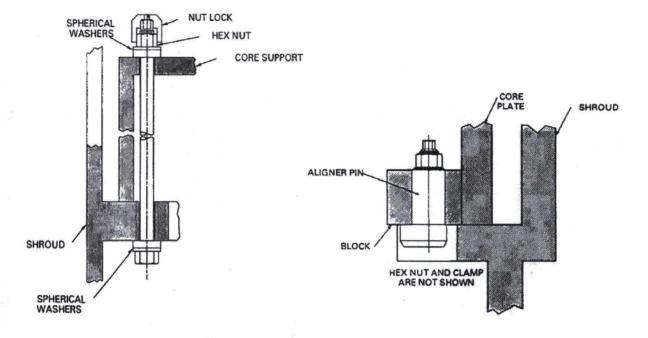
Core Plate Bolt and Aligner Pin Configuration
